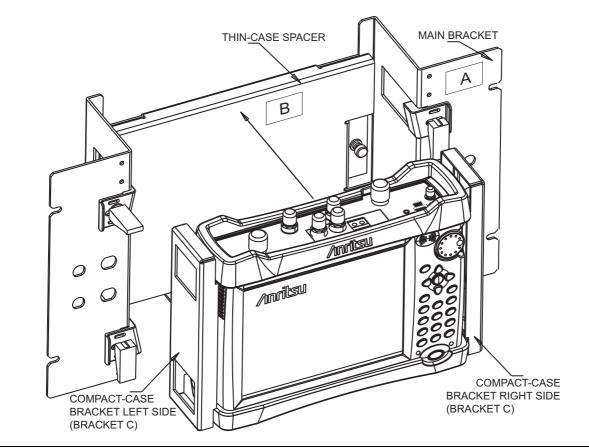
Compact-Case Rack Mount — Mounting the Instrument
